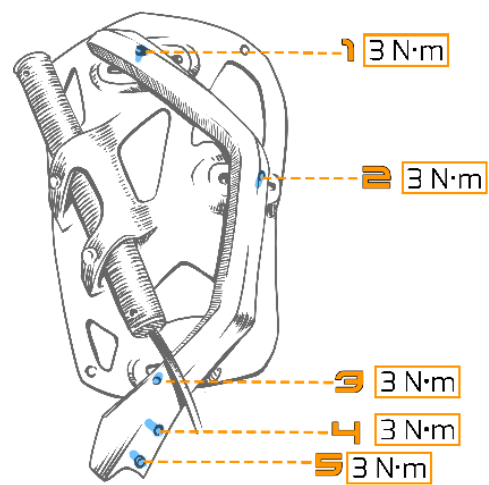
Appropriate Torque Values for the Thigh Assembly.
